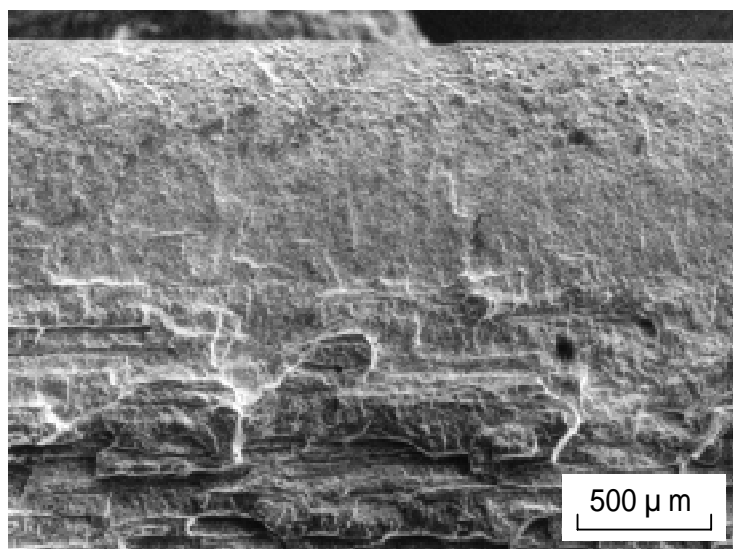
Typical fracture surface of SRIQ gear
